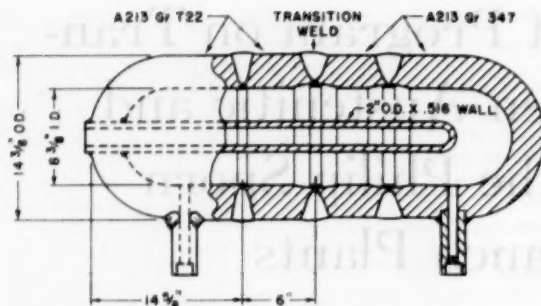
CROSS SECTION OF WELD TEST VESSEL
